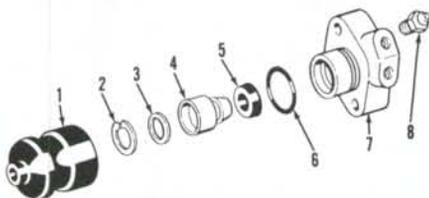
Exploded view of wheel cylinder showing component parts and their relative positions.
